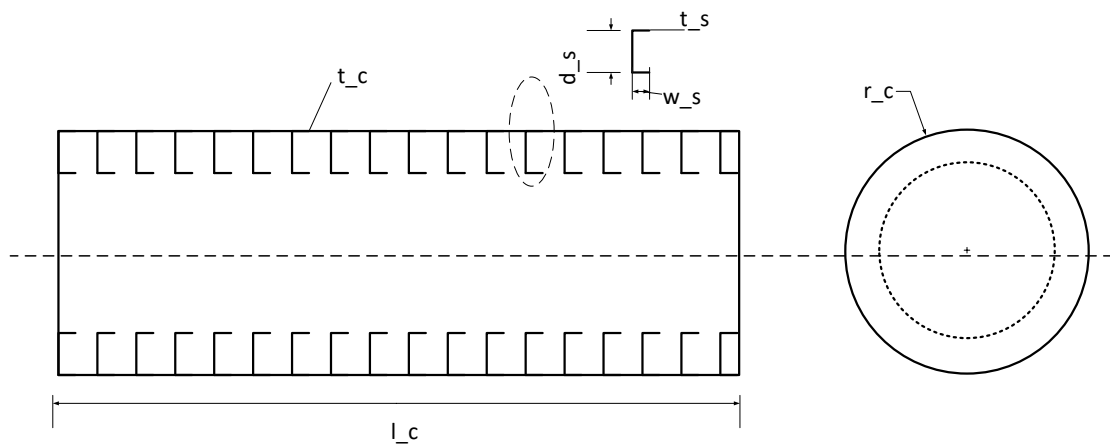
The drawing of the geometry of the ring-stiffened cylinder test structure.
